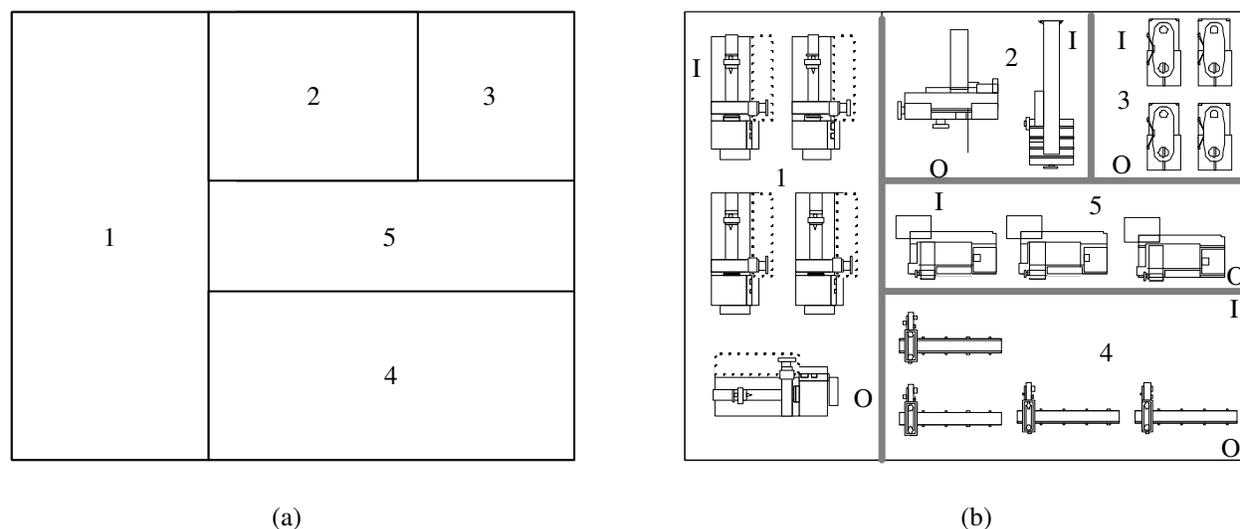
Facility Layout Solutions in (a) Block Layout and (b) Detailed Layout.
